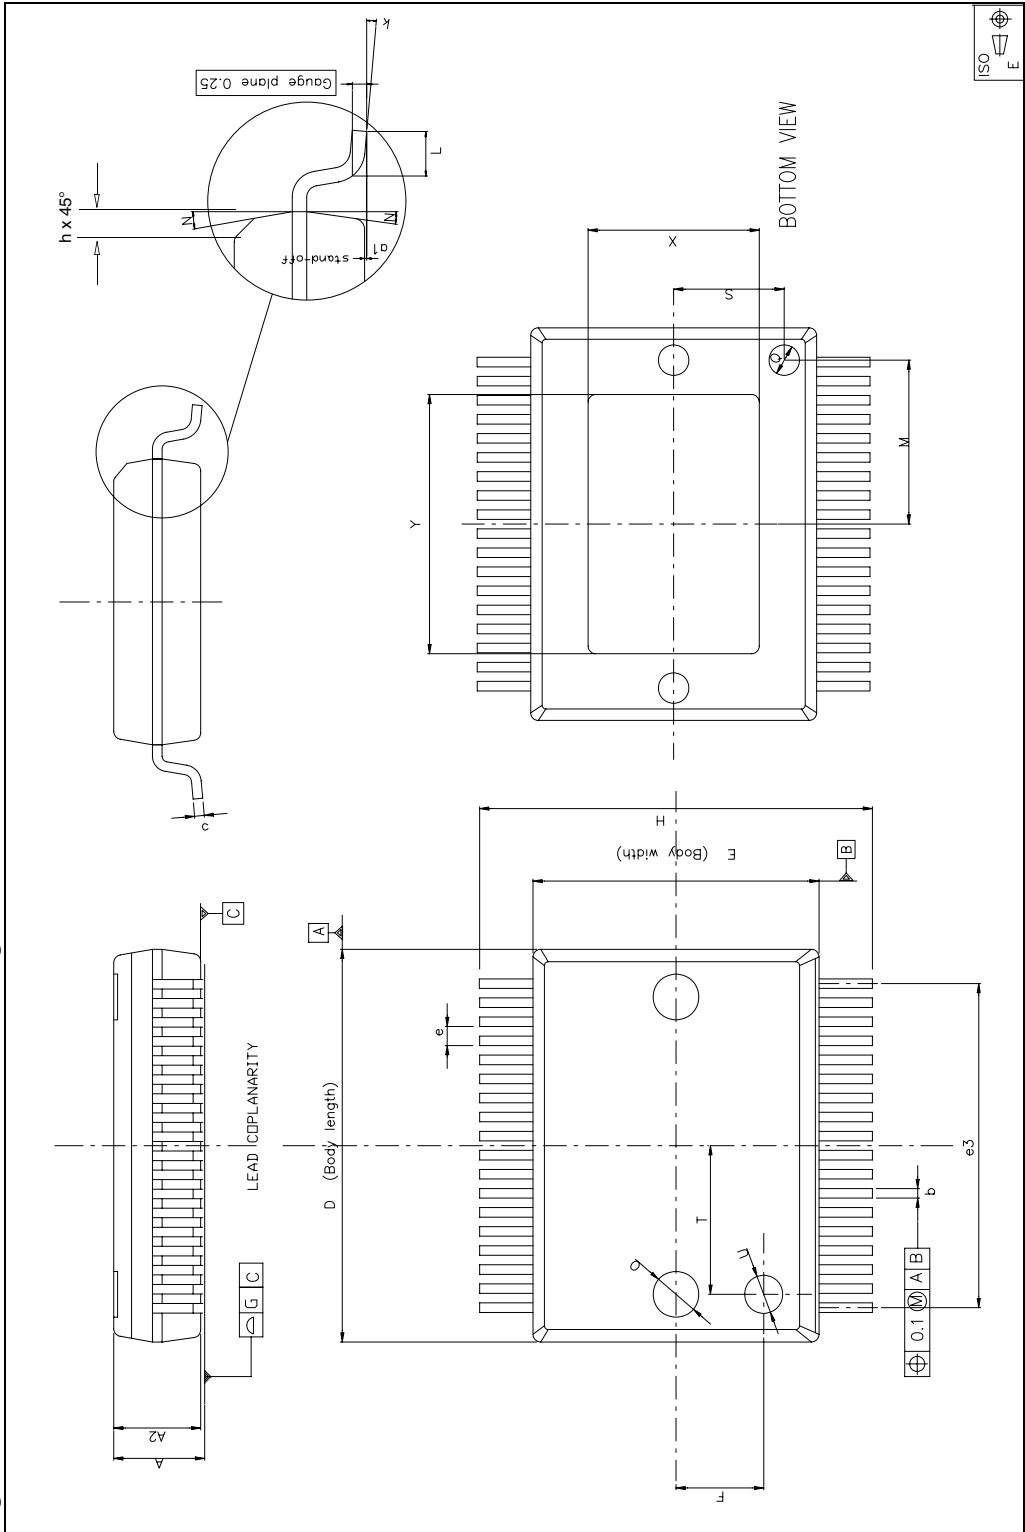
(#) below shows the package outline and [Table 9](#) gives the dimensions.
